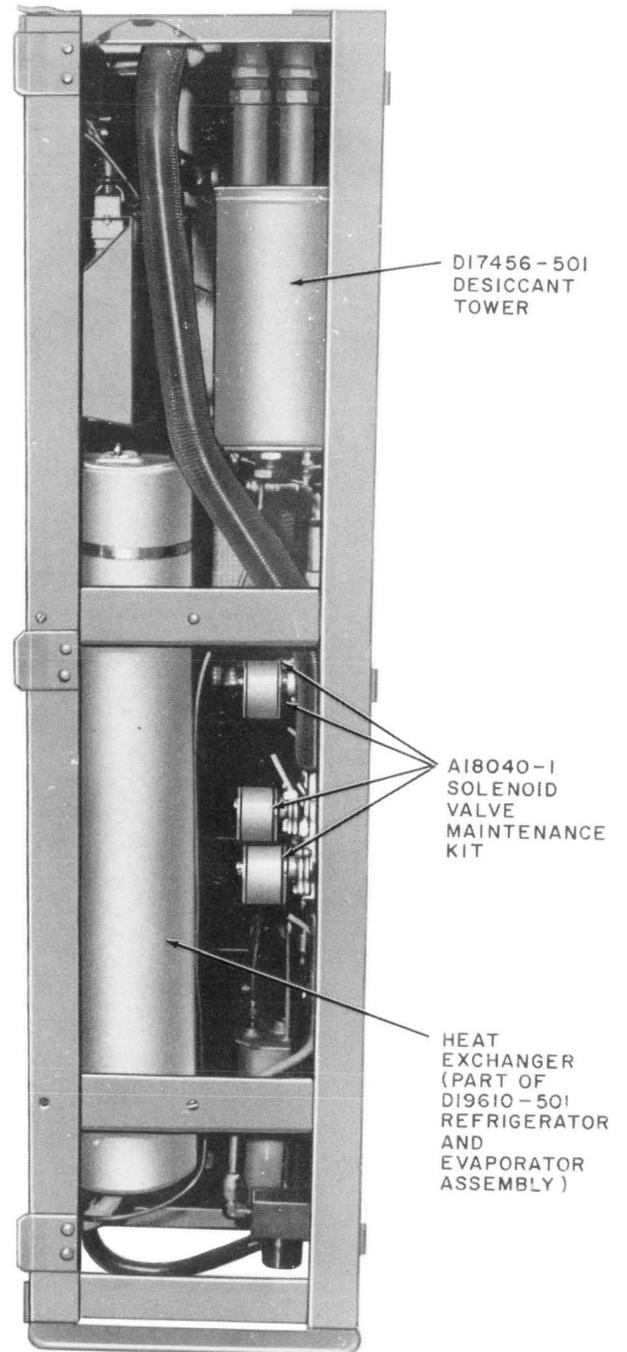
KS-20183 L1 Air Dryer—Right Side View—Cover Removed
